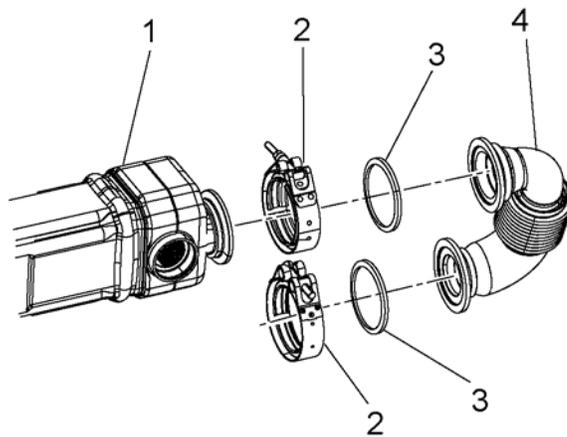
EPA07 DD15 EGR Cooler and Related Parts
